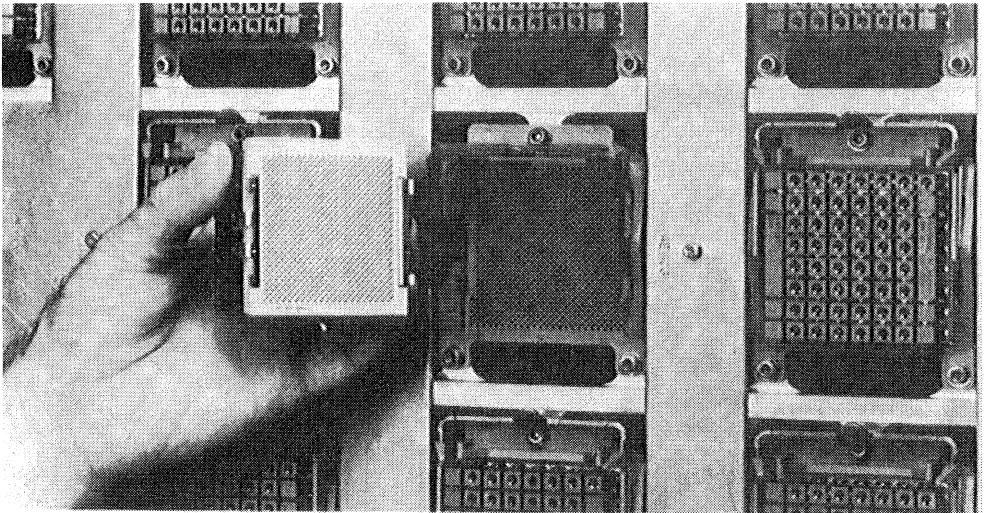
New MCM 36 chip module being inserted into a printed circuit board.
